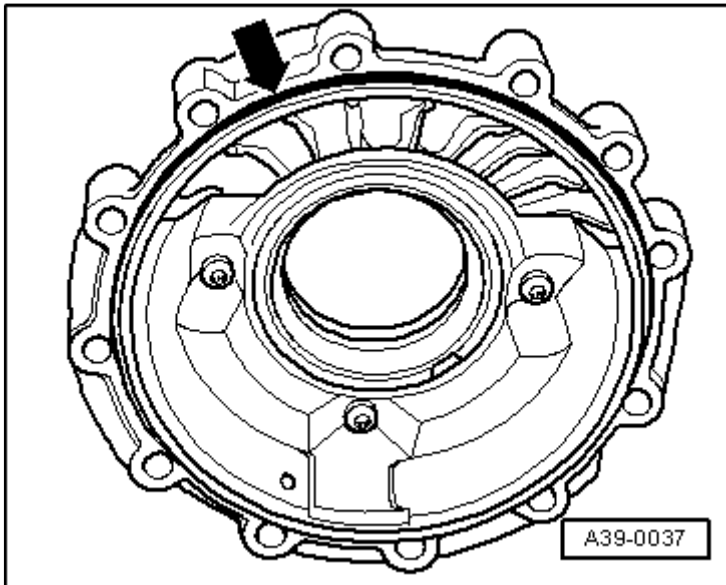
Identifying Cover For Front Final Drive And O-Ring
